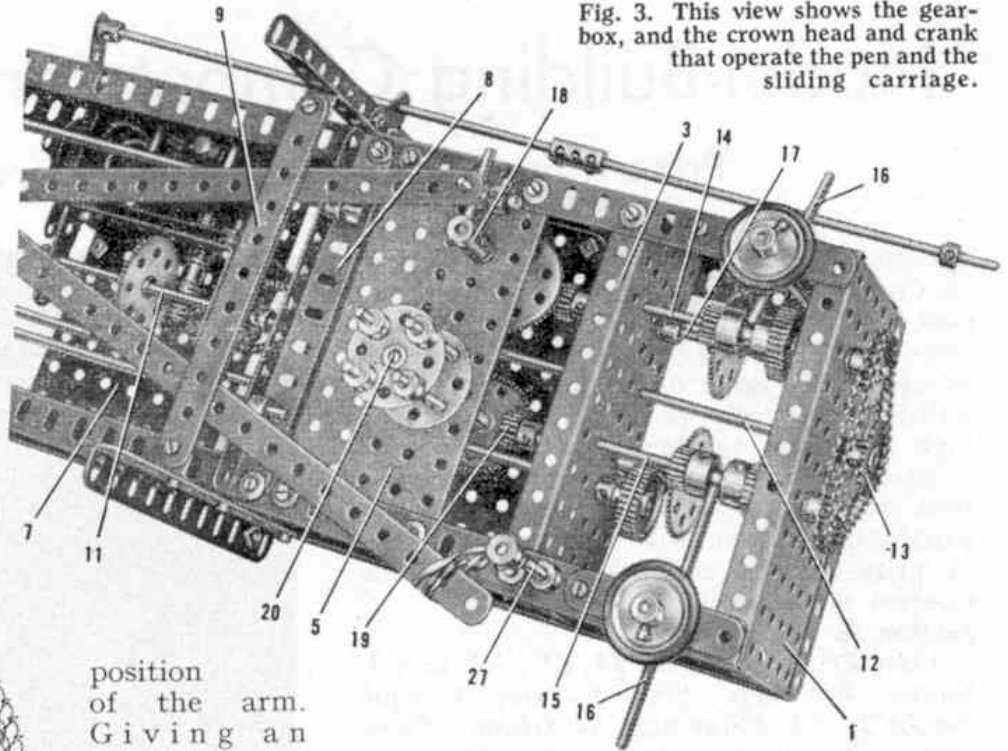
This view shows the gear-box, and the crown head and crank that operate the pen and the sliding carriage.
